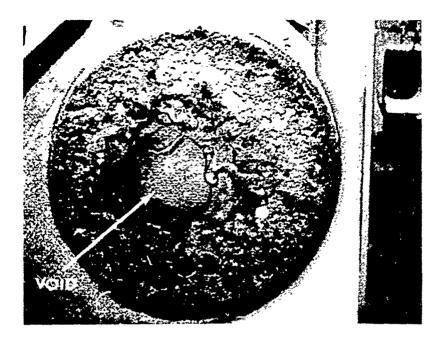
View of large void area in solder interface between power transistor mount and package bottom (8X).
